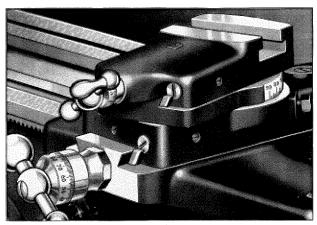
Close-up Showing Adjustable Tapered Gibs Used on Compound Rest Base and Top Dovetails
